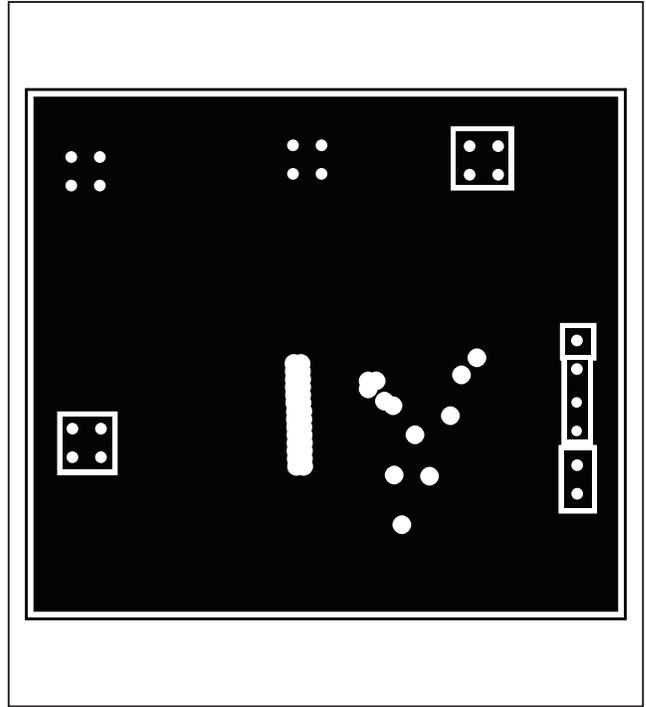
MAX15066 EV Kit PCB Layout—Inner Layer 2
